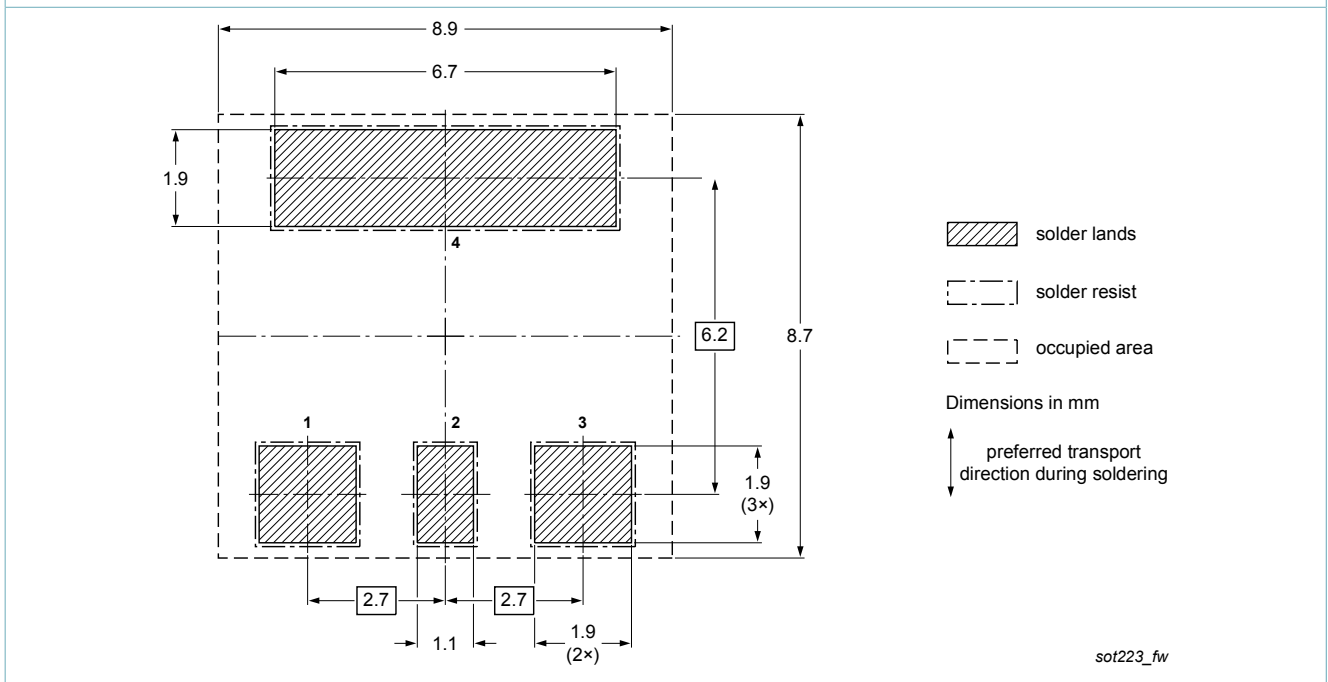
Wave soldering footprint for SC-73 (SOT223)
